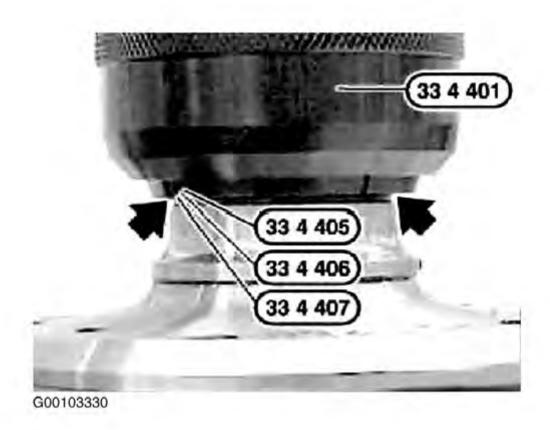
Detaching Wheel Bearing Inner Race Courtesy of BMW OF NORTH AMERICA, INC.
